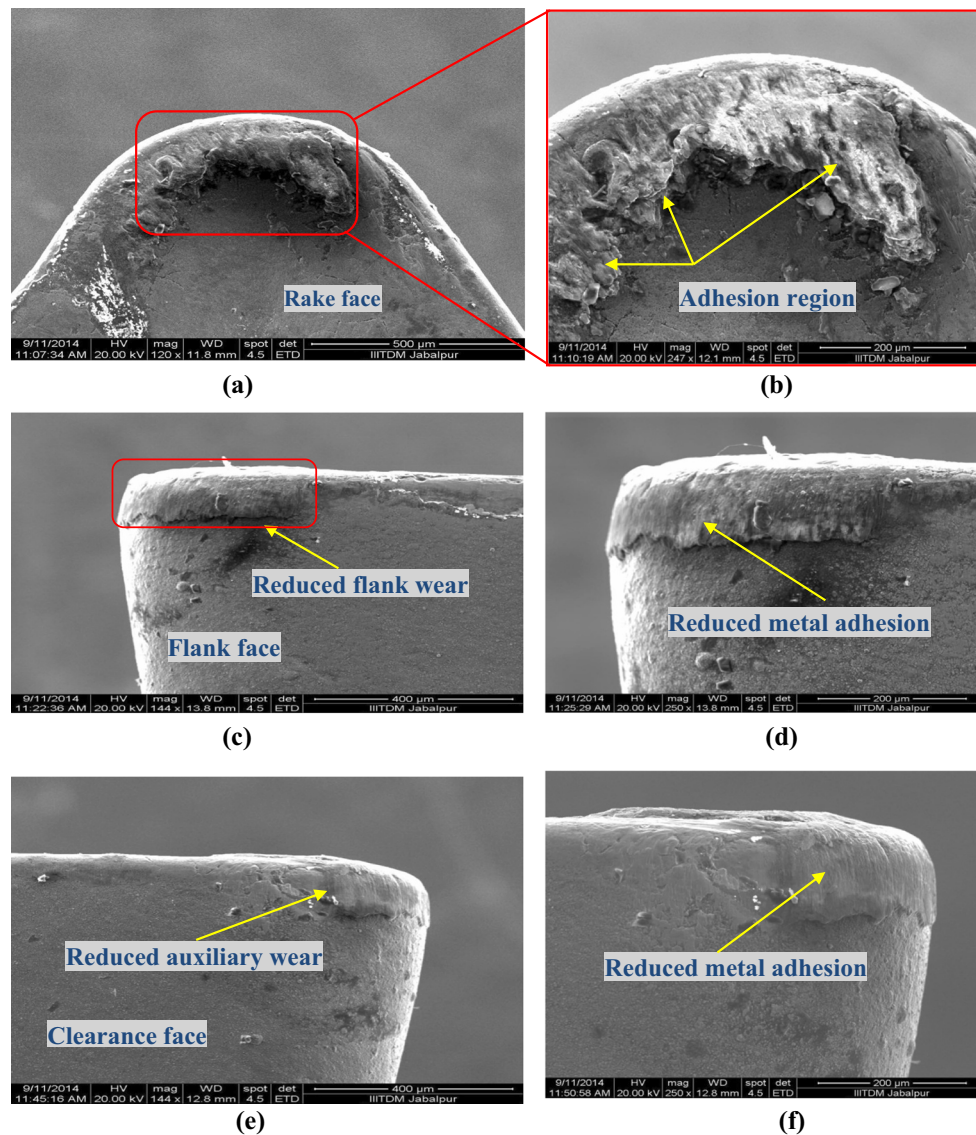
SEM views of worn-out insert under wet cutting condition a crater wear, b close-up view of crater wear, c flank wear, d close-up view of flank wear, e auxiliary wear, f close-up view of auxiliary wear
